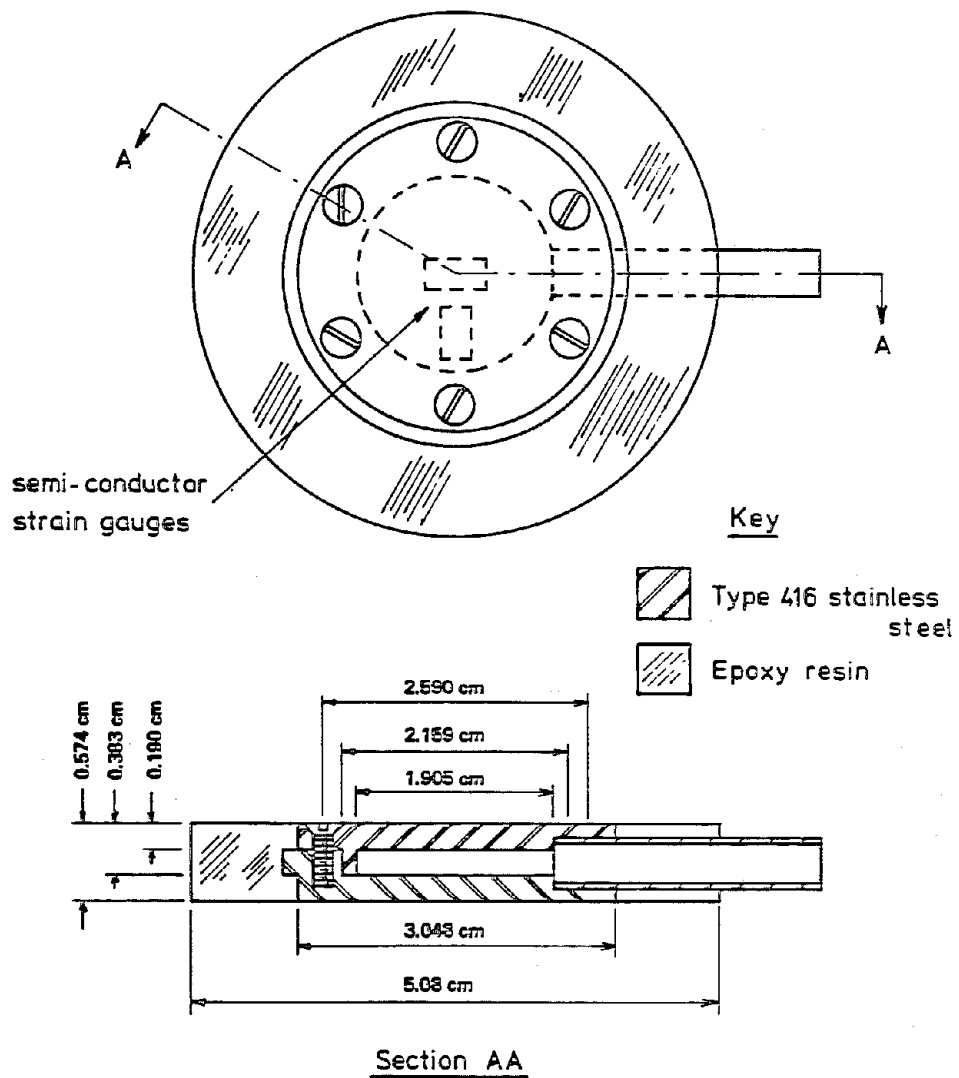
Plan and cross-sectional views of an SE pressure cell. ^[18]
